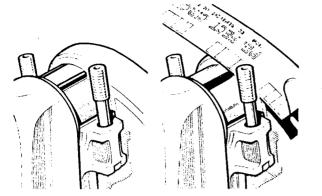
Using Plastigage to measure bearing clearance 1 Plastigage strip 2 Measuring flattened Plastigage
